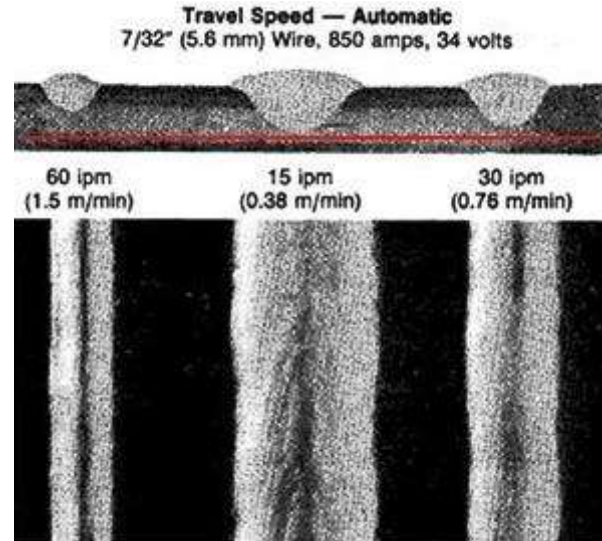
Effect of welding speeds on weld bead width and its profile [20]
